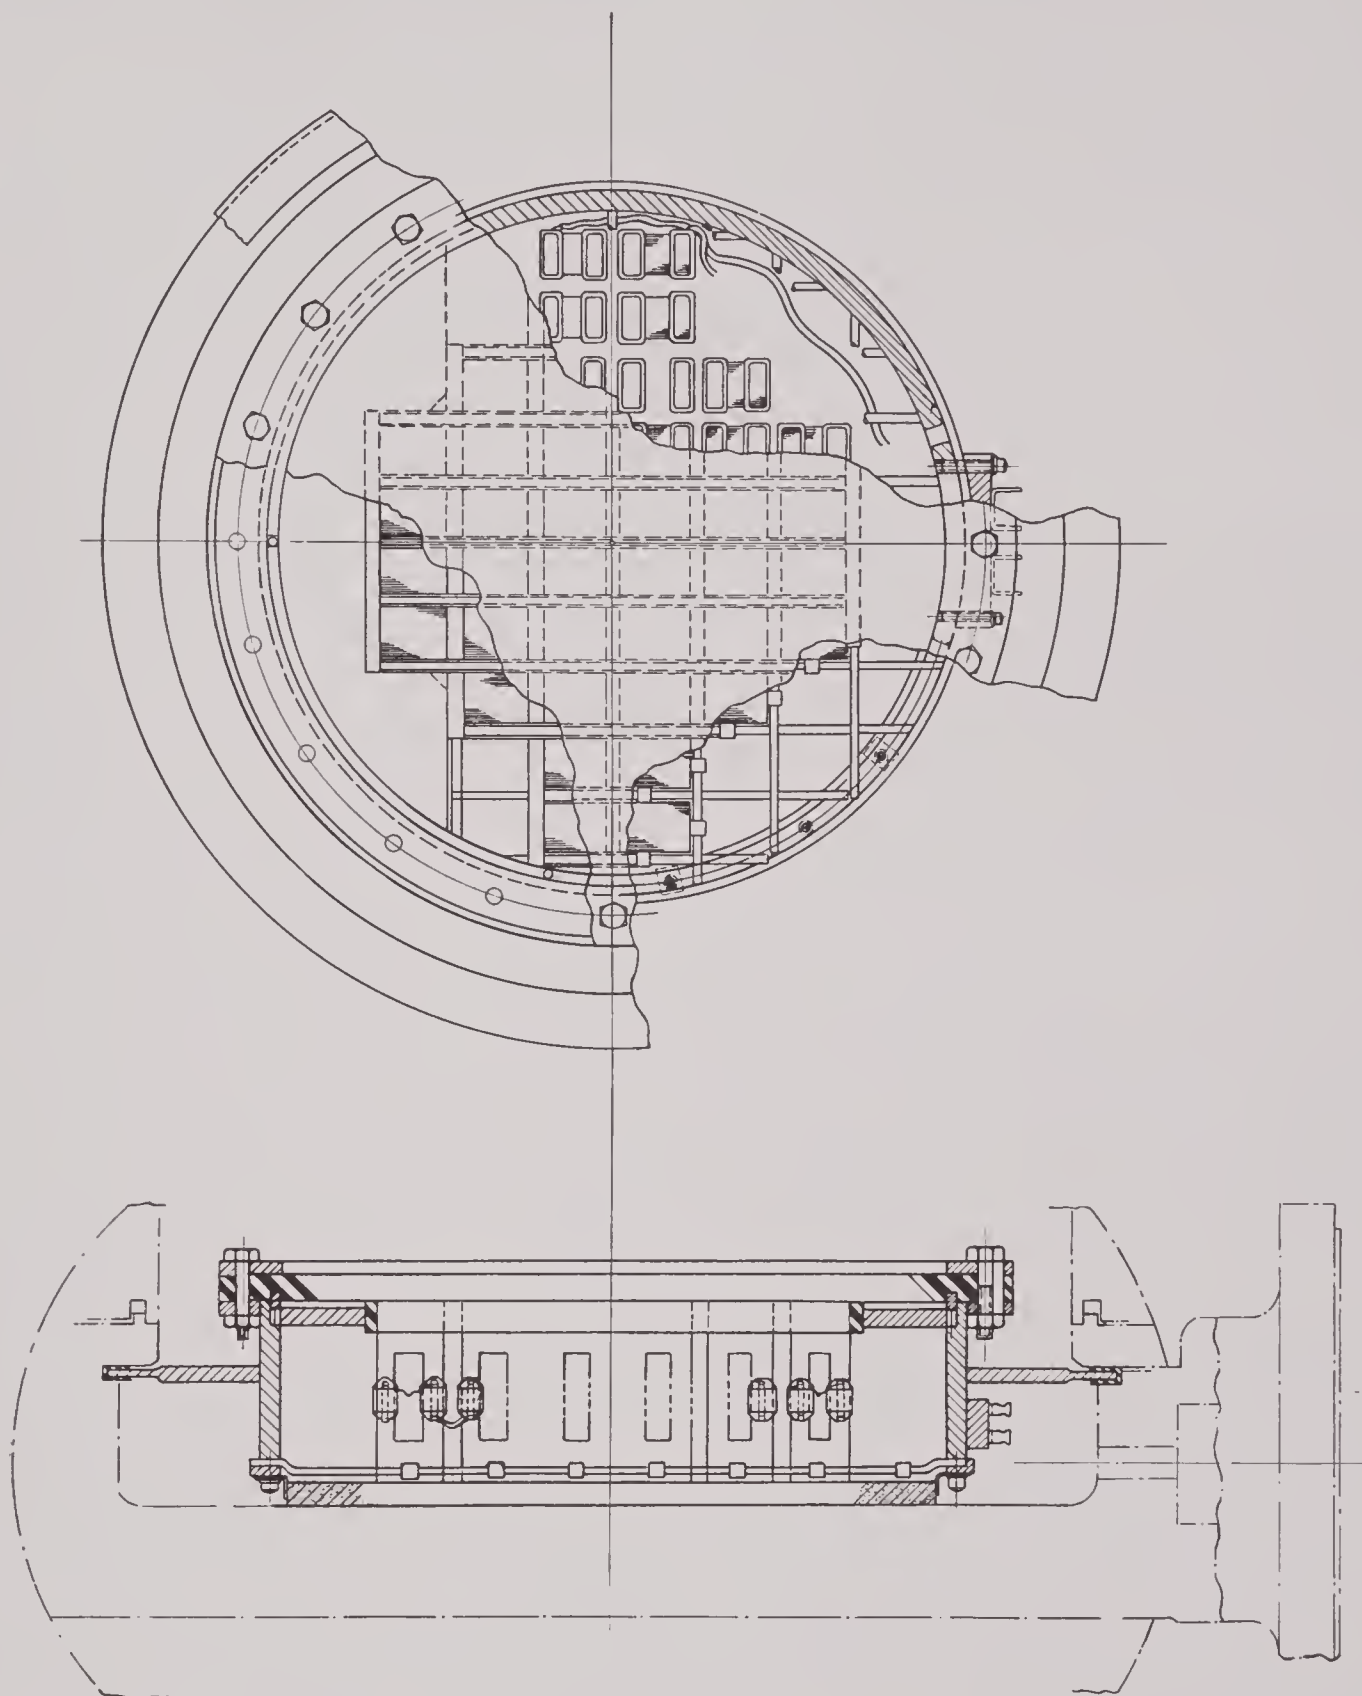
General assembly drawing of BTL's CI-100 transducer.
